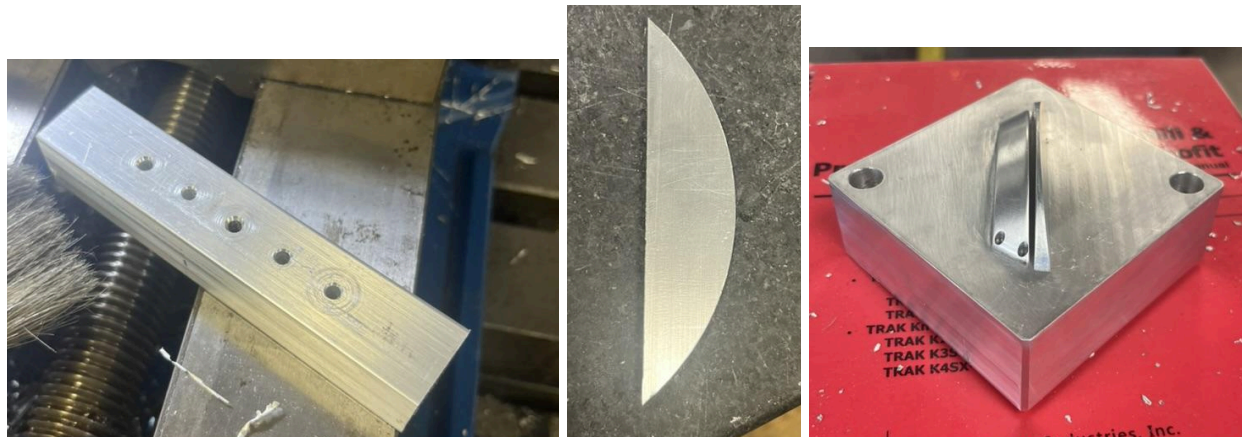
Fixture plate, finished insert, and assembly of mold and insert
